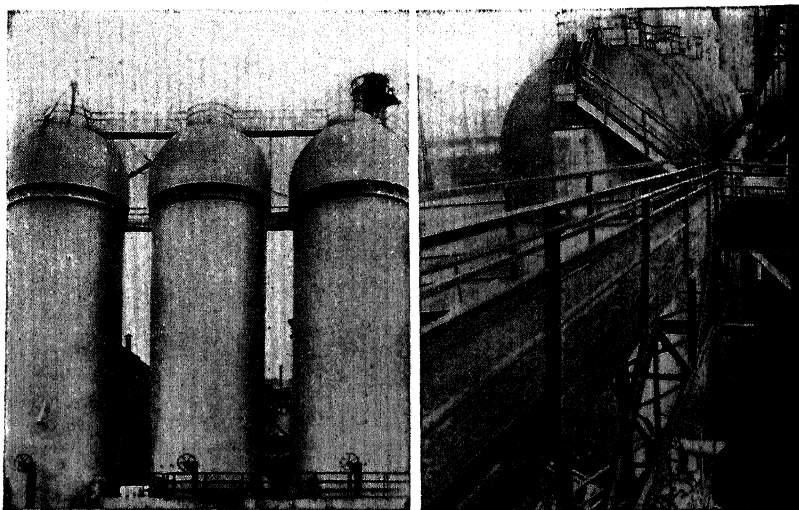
Six blast furnace stoves of all arc welded construction erected at a large Penn. steel mill. 24 ft. diameter, 104 ft. high, built from $\frac{3}{4}$ -in. and $\frac{5}{8}$ -in. steel plates, butt welded. Saved 30% in weight and 50% in time of erection over conventional construction.
